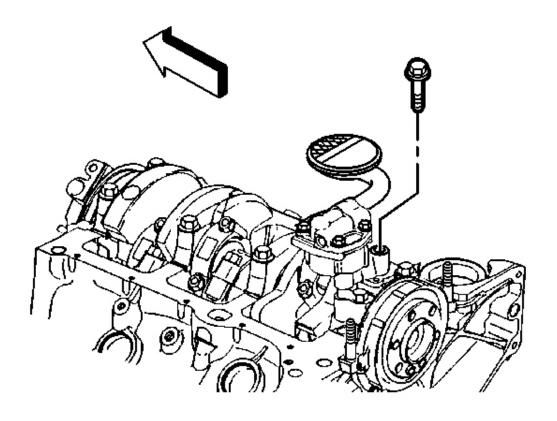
View Of Oil Pump Bolt Courtesy of GENERAL MOTORS CORP.
